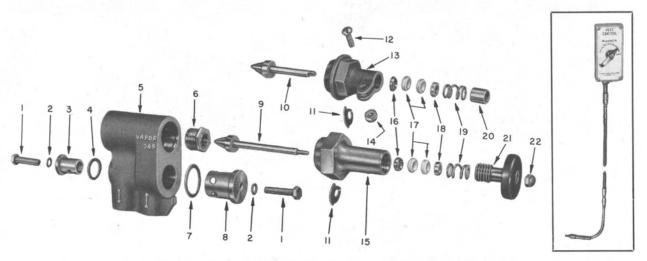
Exploded View of 949 Type Valve, and View of Remote Control Mechanism
